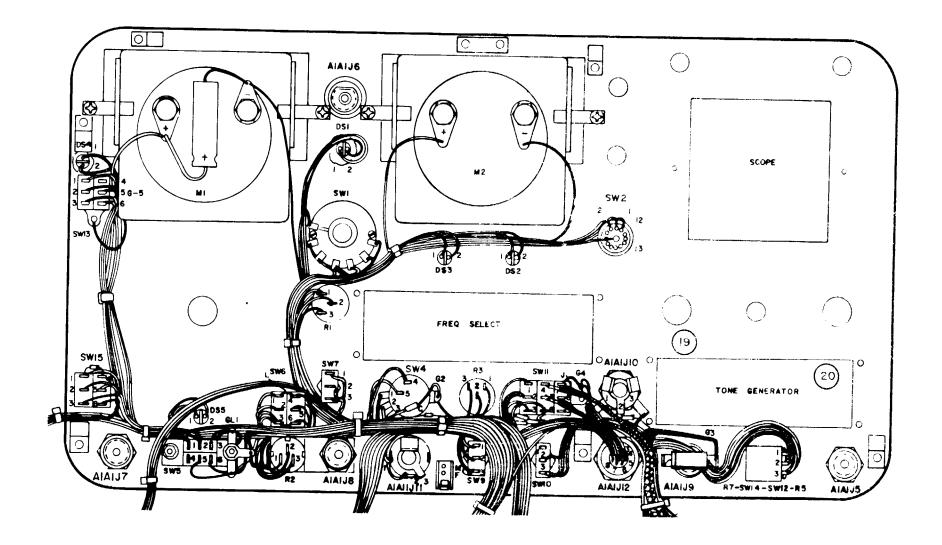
Front panel A1A1 (rear view) component location diagram
